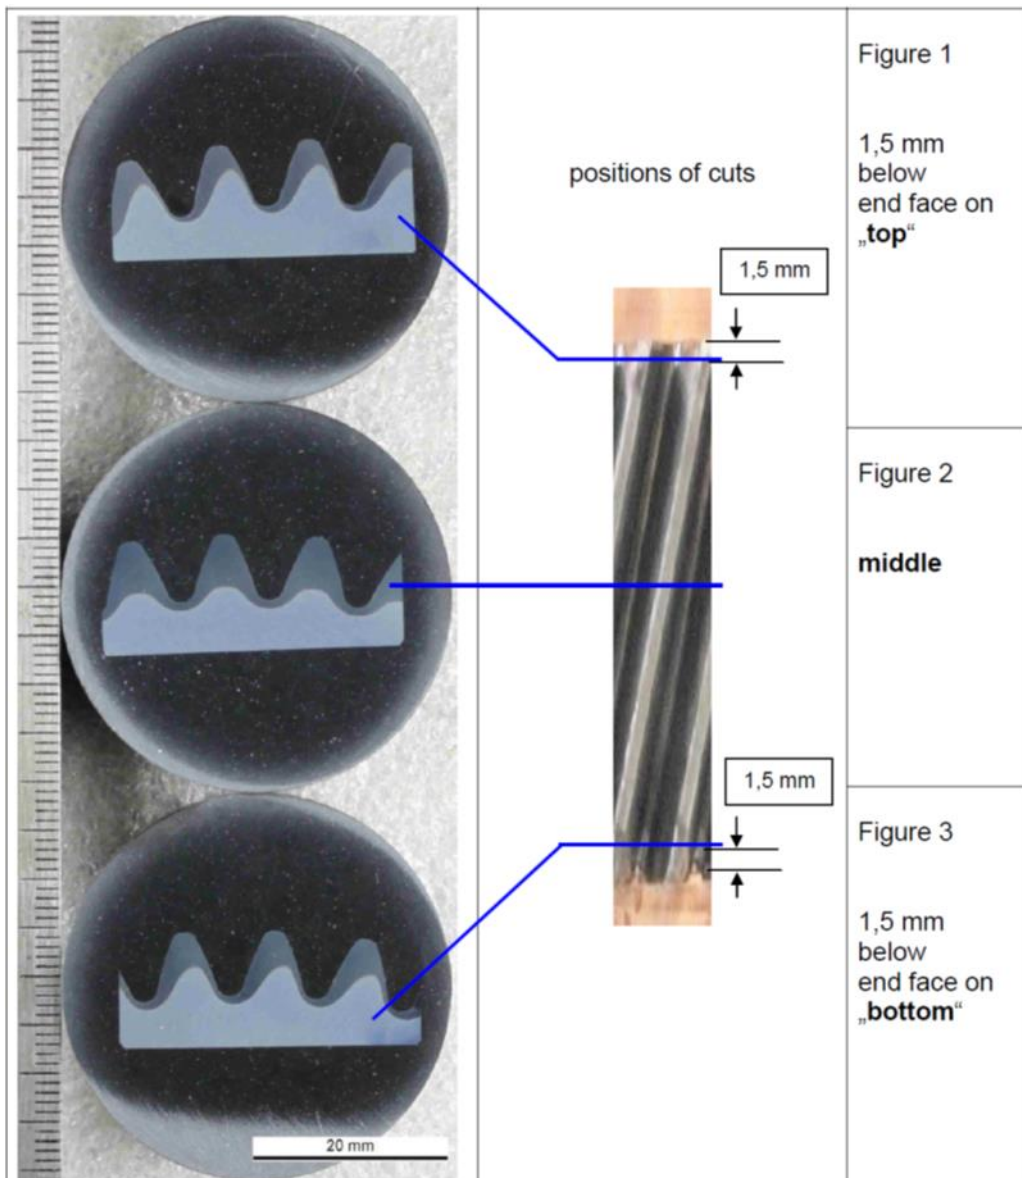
Cross sections of the optimized hardened gear tooth obtained.
